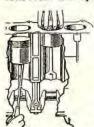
Method of removing pistons and connecting-rods from the top on the Chevrolet engine (series V and X) is as follows: Remove the cylinder head. Drain the oil from the lower crank case by removing the drain plug from the bottom of the case.
